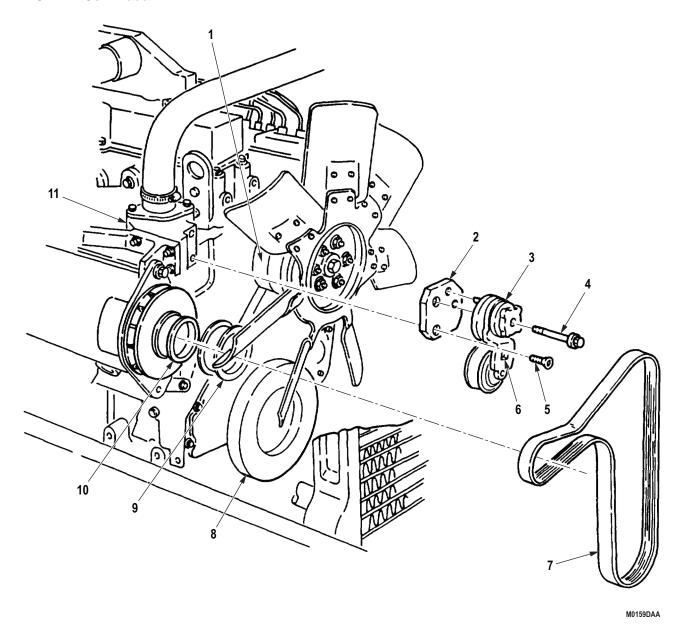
Fan Drivebelt and Drivebelt Tensioner Removal.
